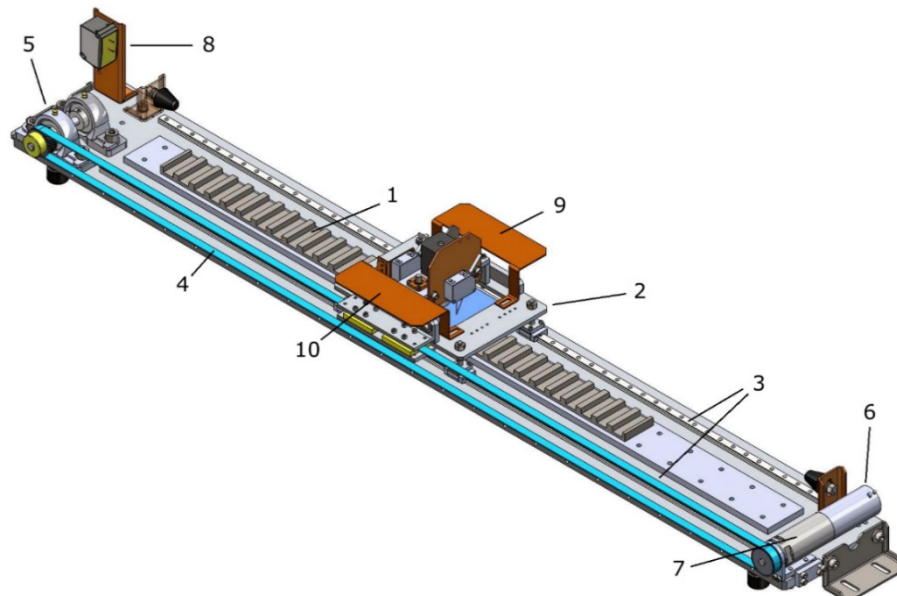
test arrangement comprising a stator rail (1), carrier (2), bearing bars (3), cogged belt (4), sheave (5), servo motor (6), reduction gear (7), third reference laser (8), second support bracket (9) and third support bracket (10).
